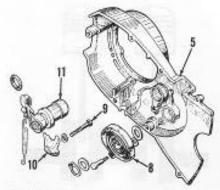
Crankcase cover and related parts. (View reversed from Fig. HN8-11).
